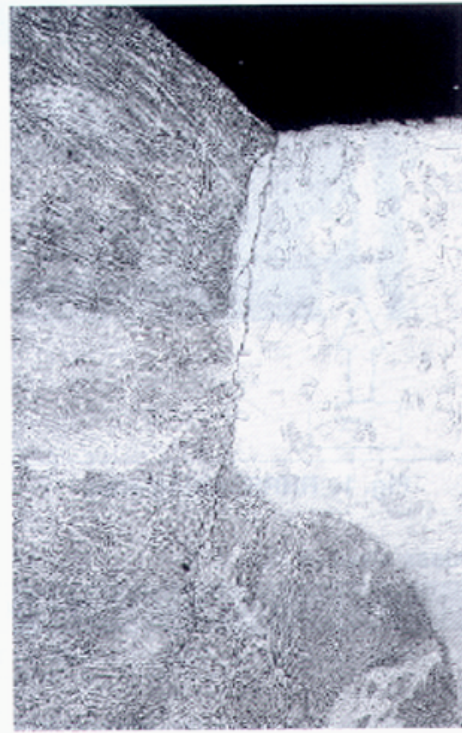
Thermal fatigue crack at the weld root of a French PWR plant piping component made of austenitic stainless steel (Cipière et al., 2002b).
